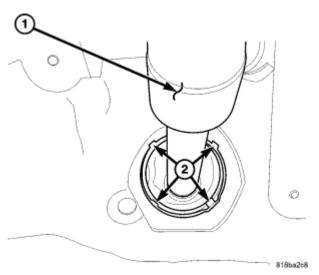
Identifying Lower Column Pinch Bolt & Steering Coupler Courtesy of CHRYSLER LLC
